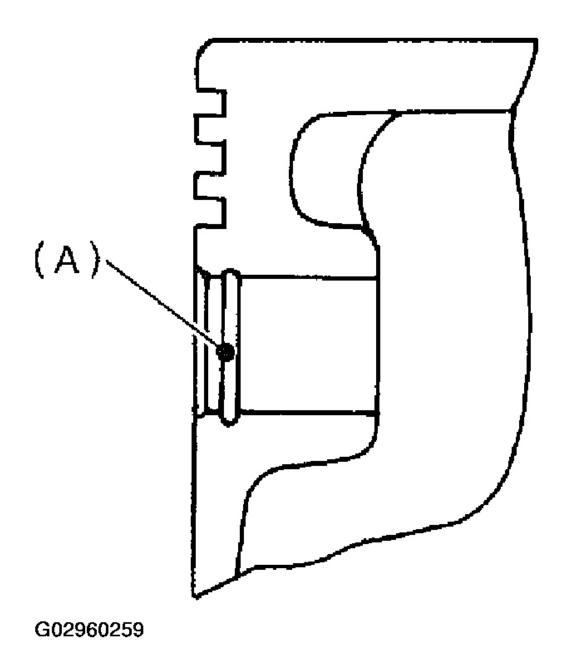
Removing Burr From Groove Courtesy of SUBARU OF AMERICA, INC.
